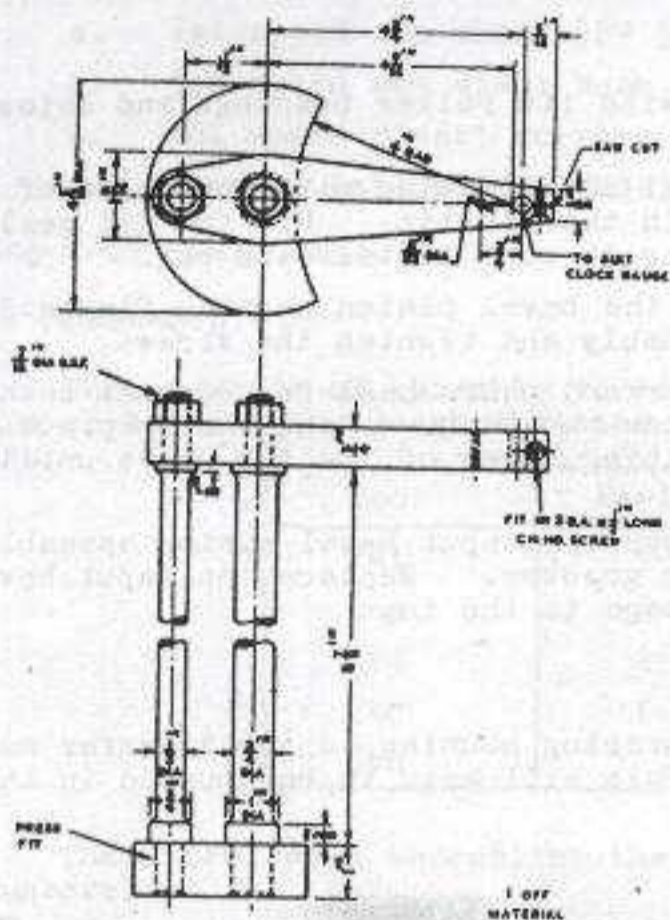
DIAL GAUGE STAND - FOR CHECKING CLEARANCE BETWEEN RUNNING GEAR AND GEARBOX CASING (LOCAL MANUFACTURE)
